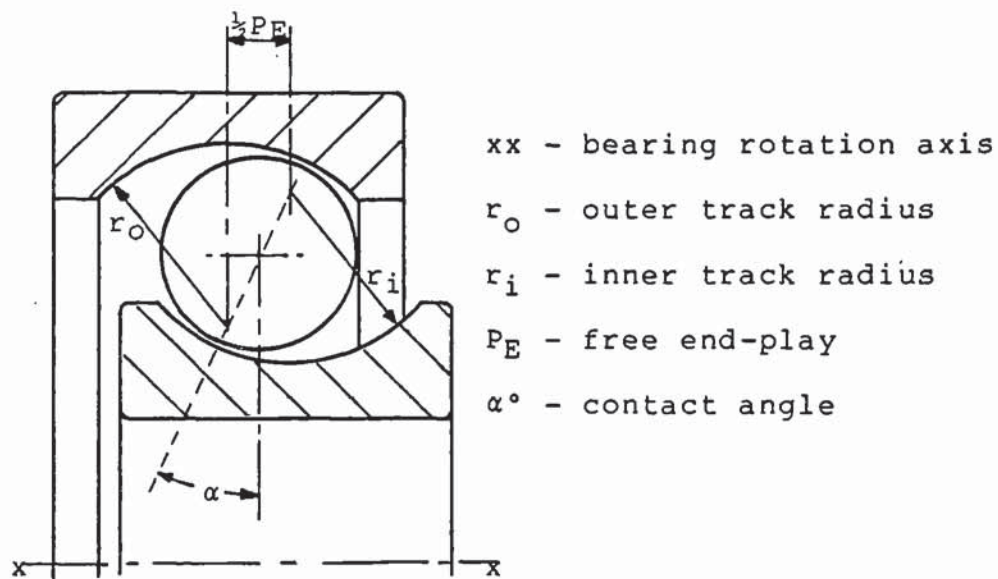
The Free Contact Angle on a Radial Ball Bearing.¹
